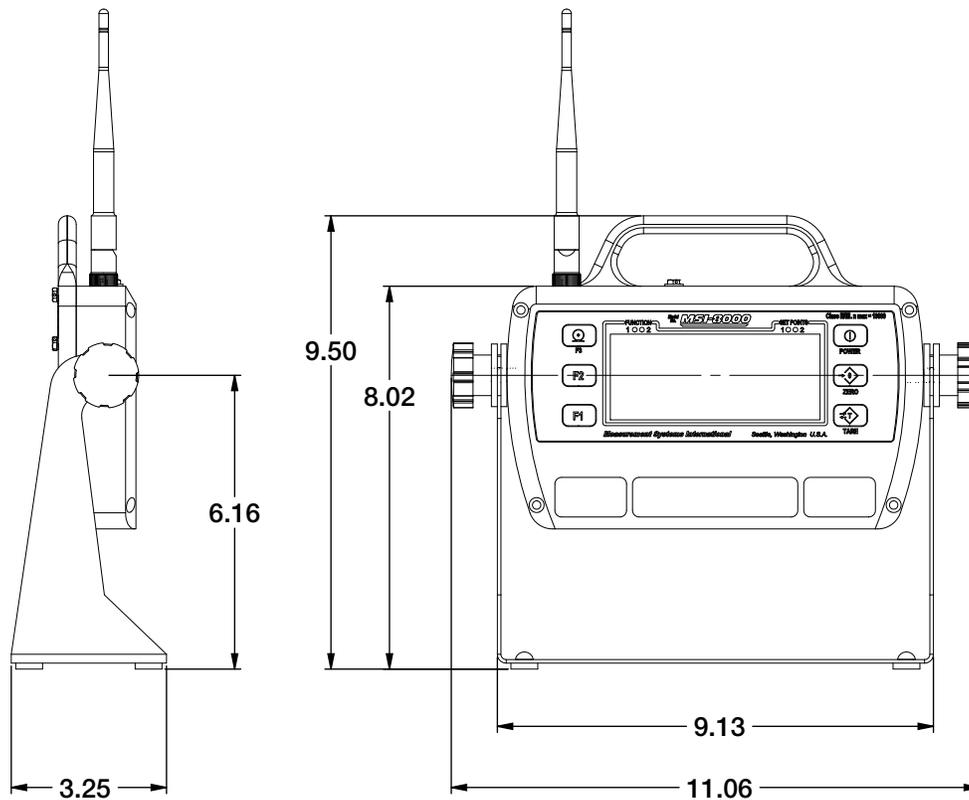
Dimensions – MSI-8000HD with Optional Tilt Stand
